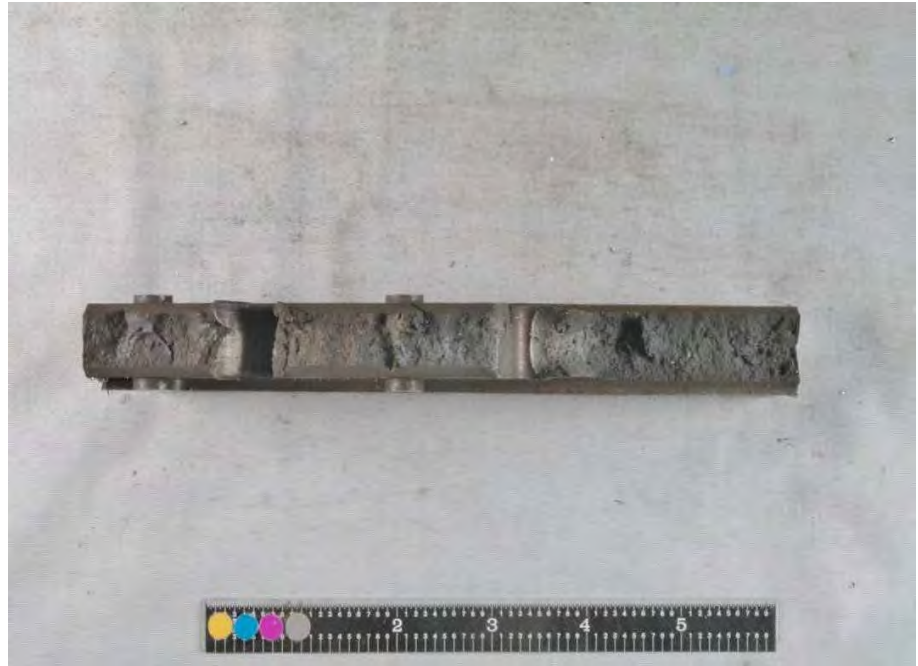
SID 14874 subsegment "A4" finger pinned attachment fracture surface.
